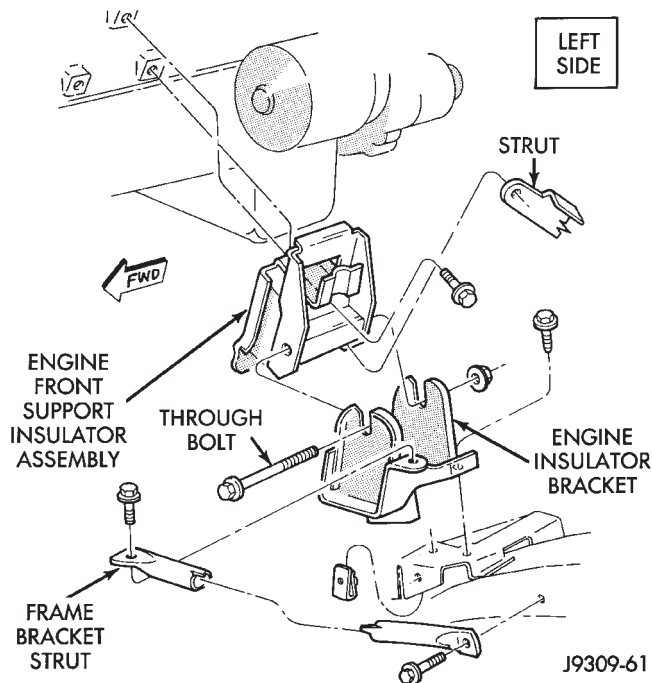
Engine Left Front Insulator Mount—2WD Vehicles
